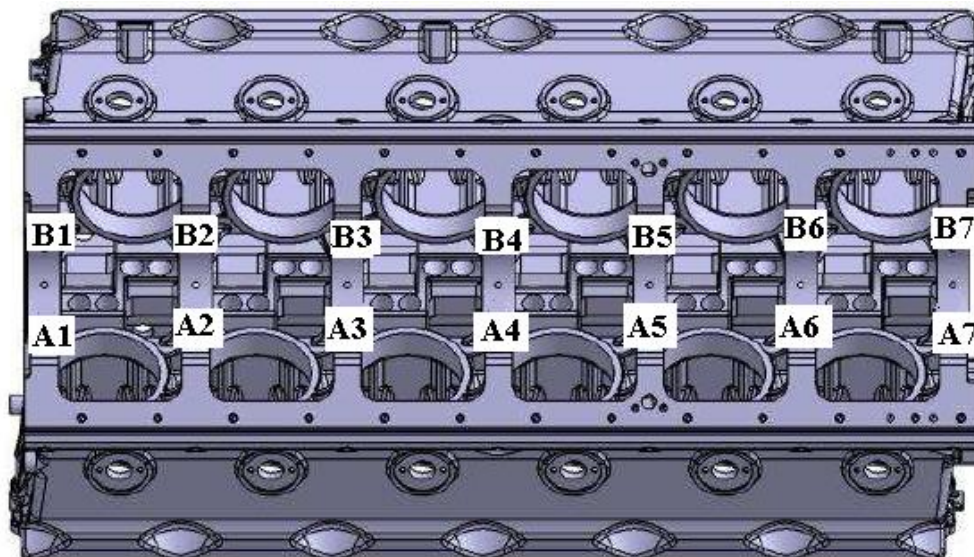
Tightening Sequence of Main Bearing Bolts
